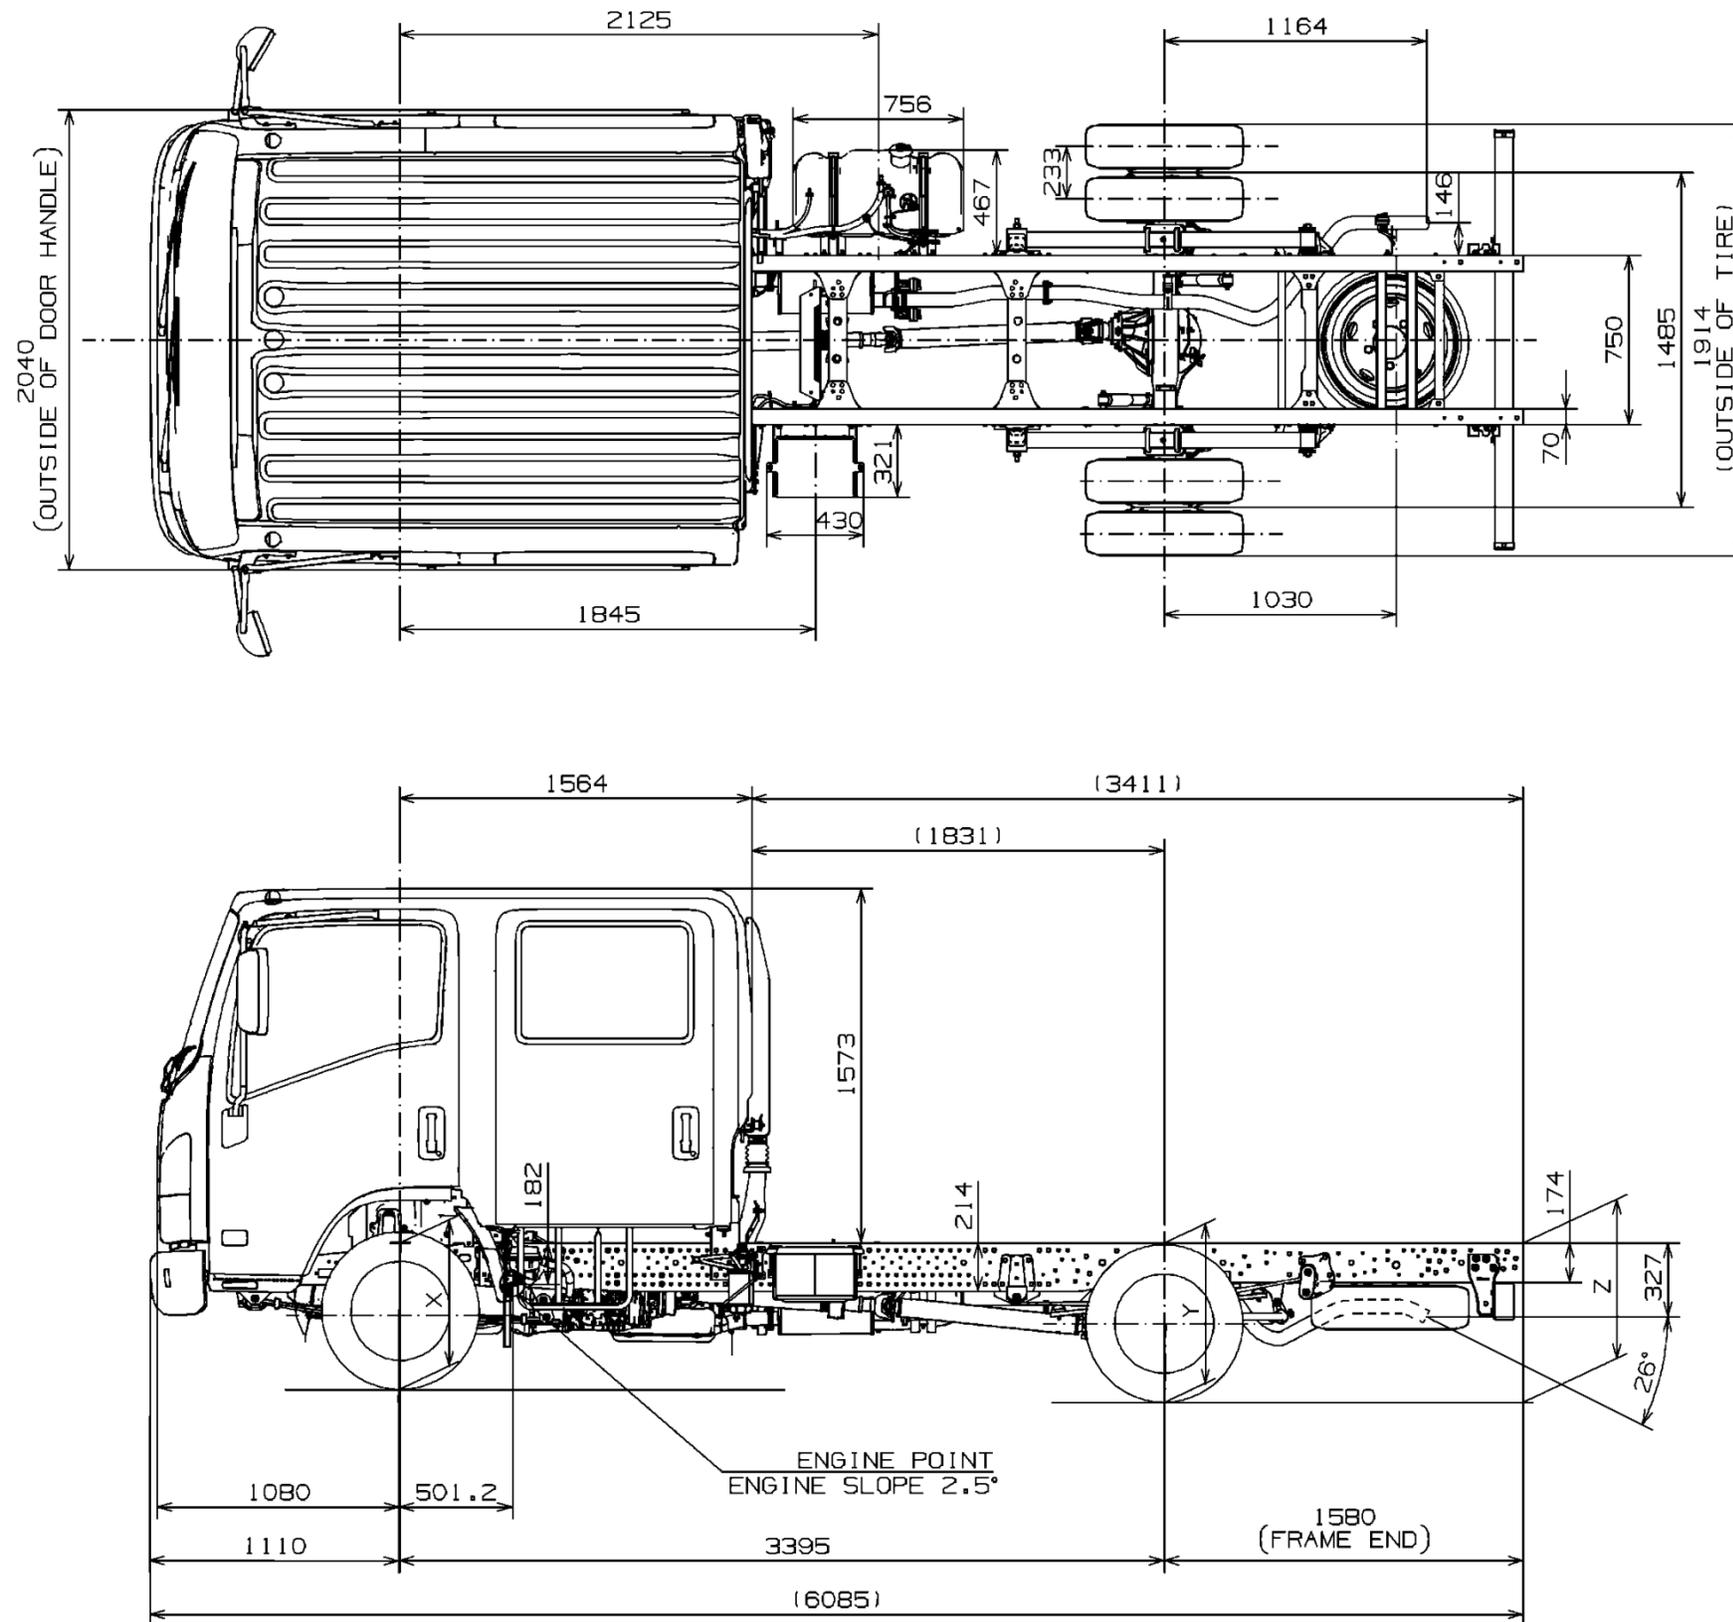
Cab Chassis Drawing NLR85AL-HD5AYE
